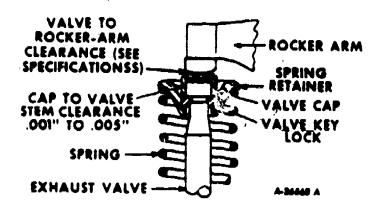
Cross-Sectional View of "Slo-Roto" Valve Cap.
